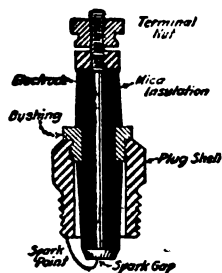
Section of a spark plug. The metal thread screwing into the cylinder head makes one connection; the central electrode, joined to the spark-coil wire by means of the thumb nut, makes the other.
